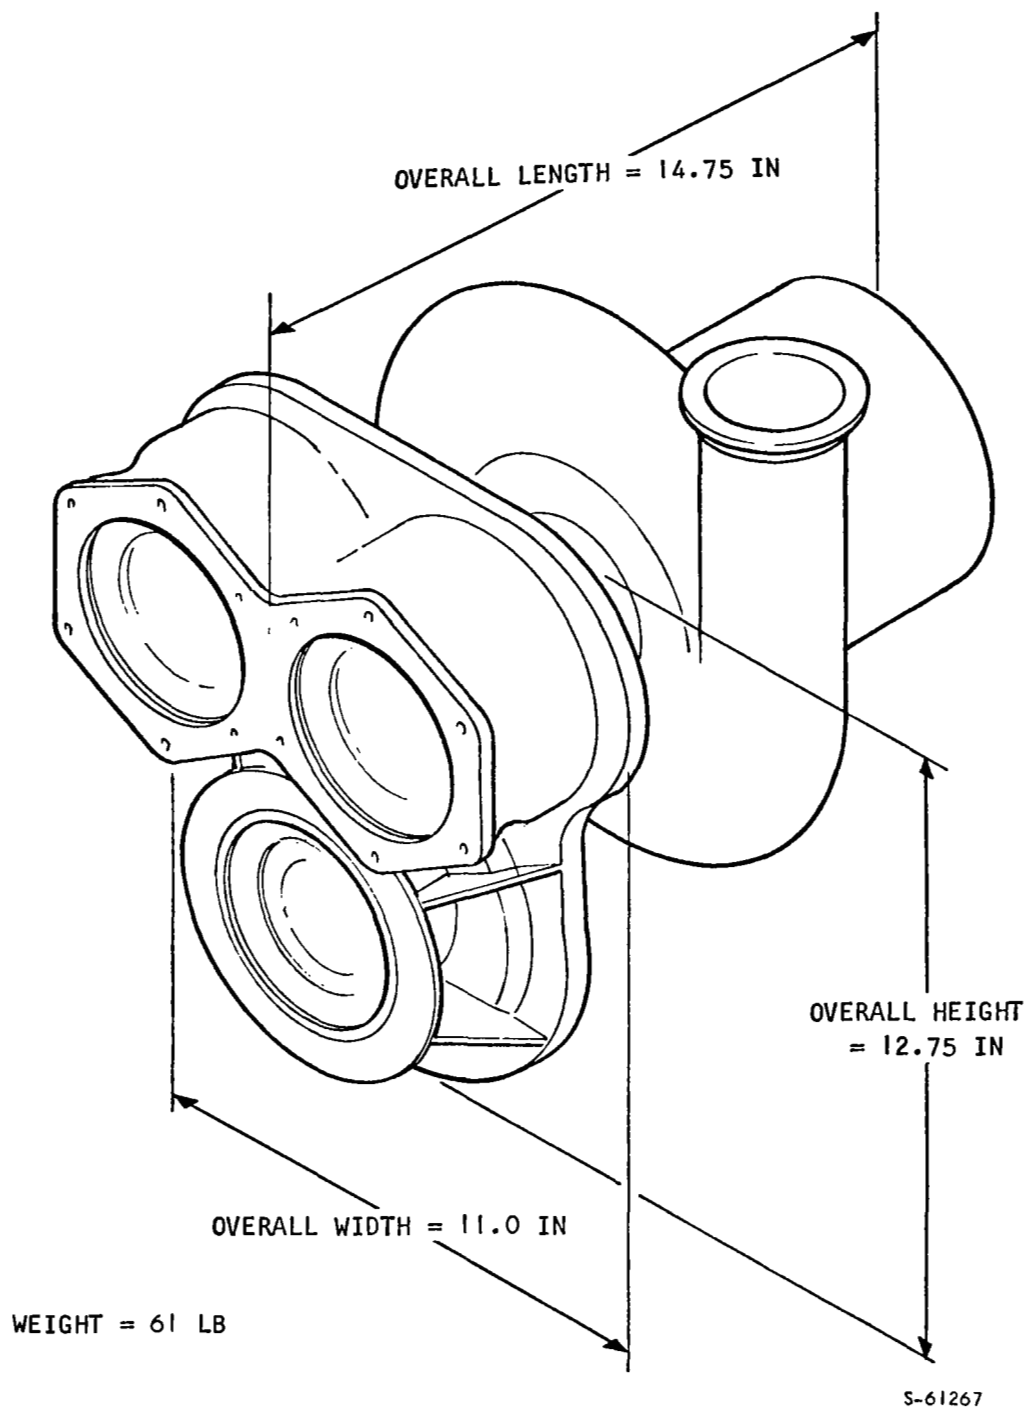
Turbine Gearbox Assembly (Less Generator and Hydraulic Pumps)
